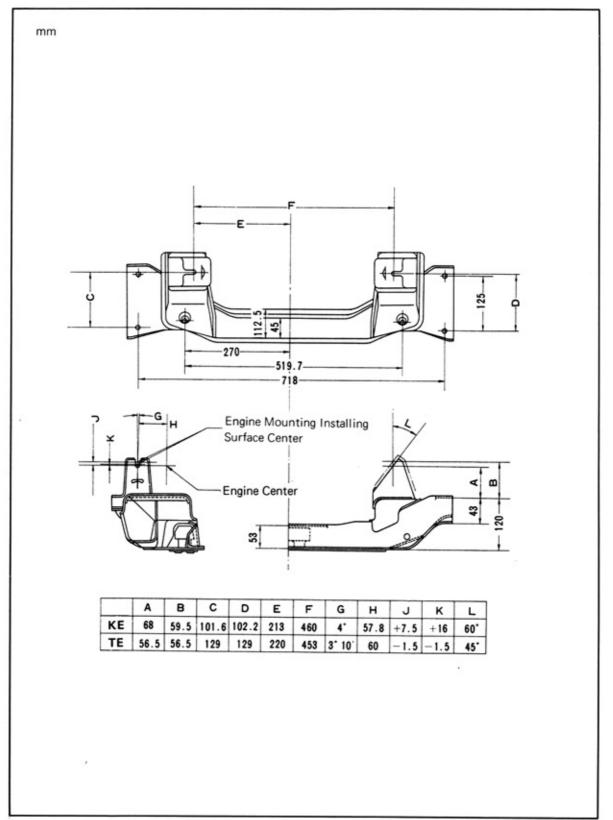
Important Dimensions of Front Suspension Cross Member
